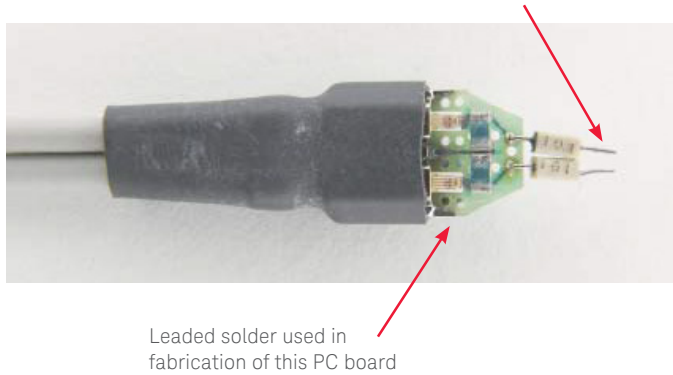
E2677A 8-GHz solder-in InfiniiMax probe head
